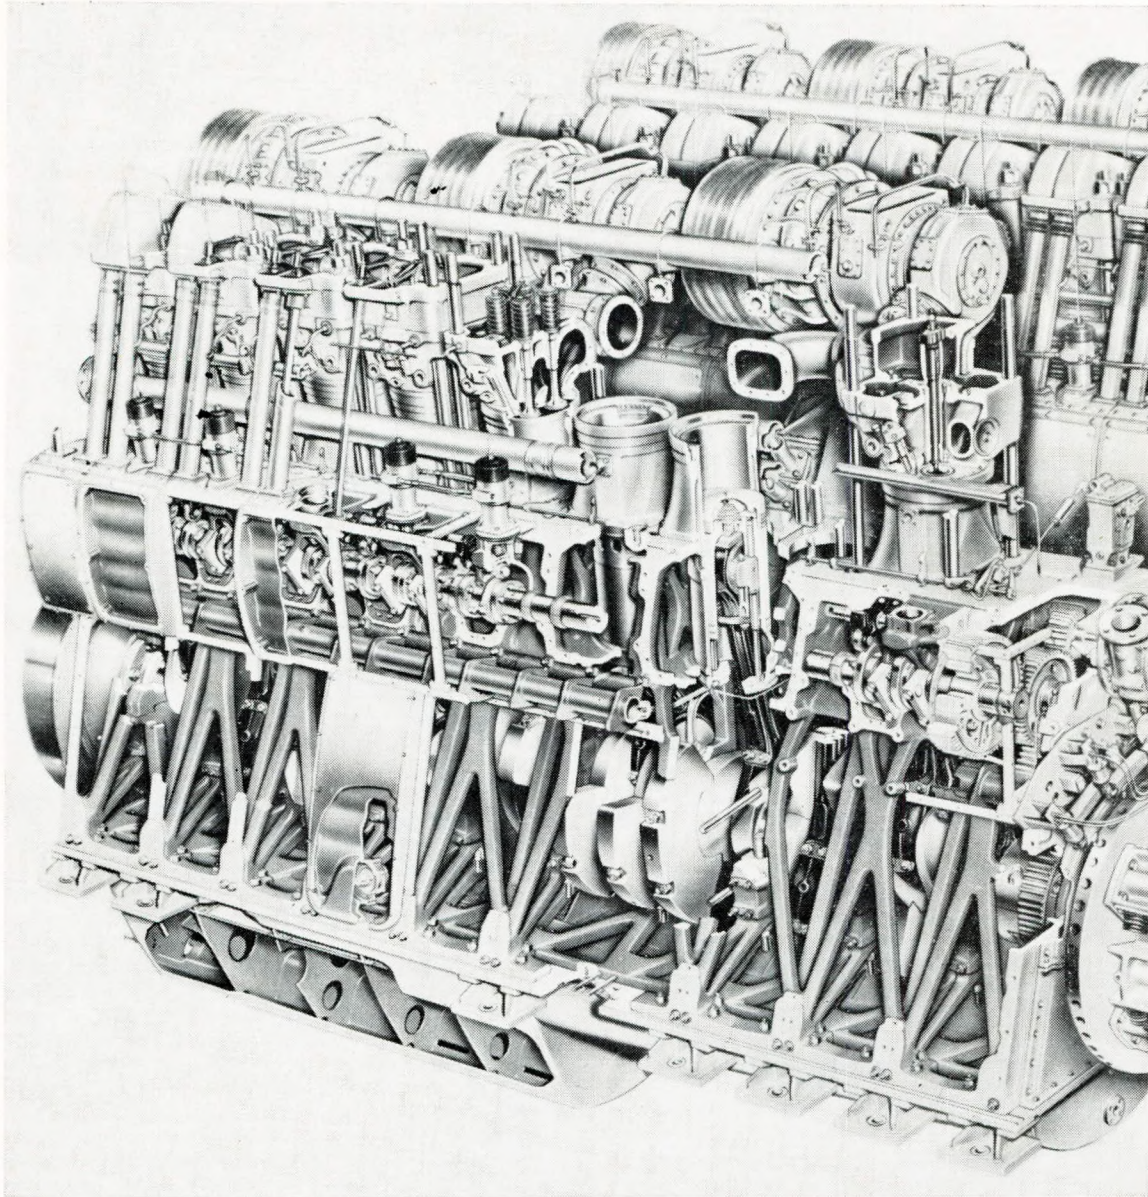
Twin 9 cylinder A.O. engine installation showing fabricated steel "space frame" supporting cylinder liners.
